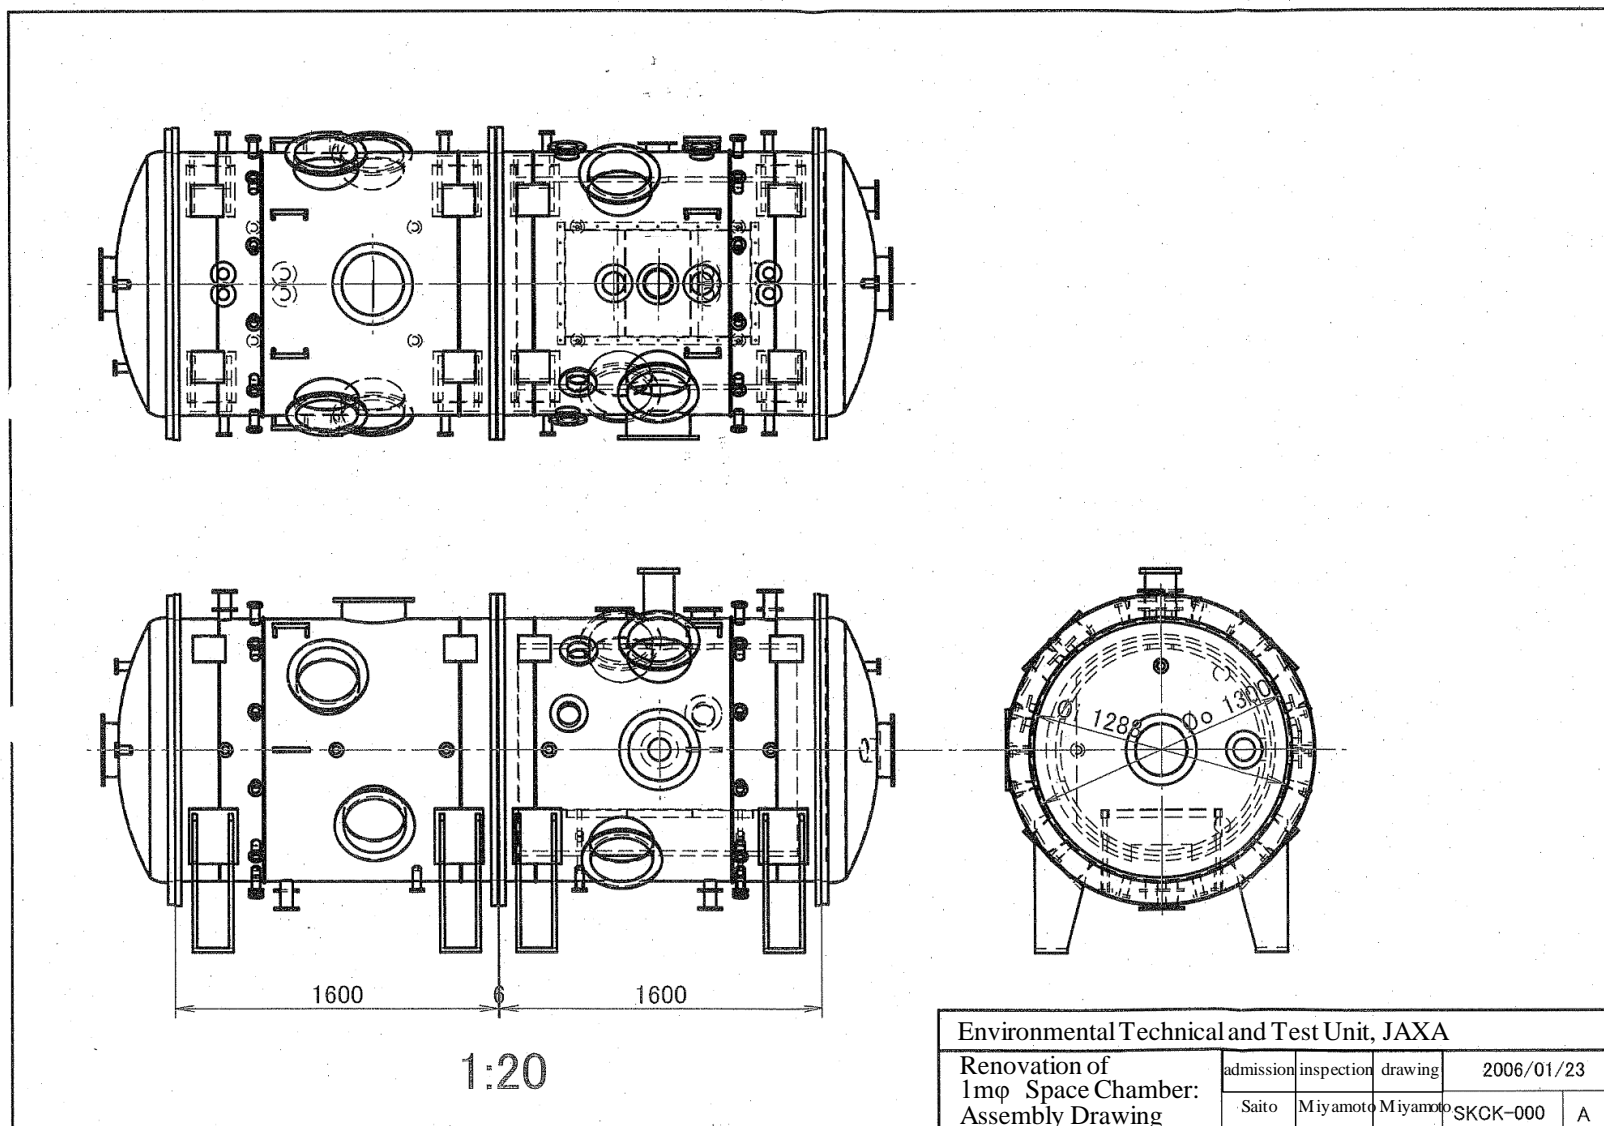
SKCK-000A Renovation of 1mφ Space Chamber: Assembly Drawing
